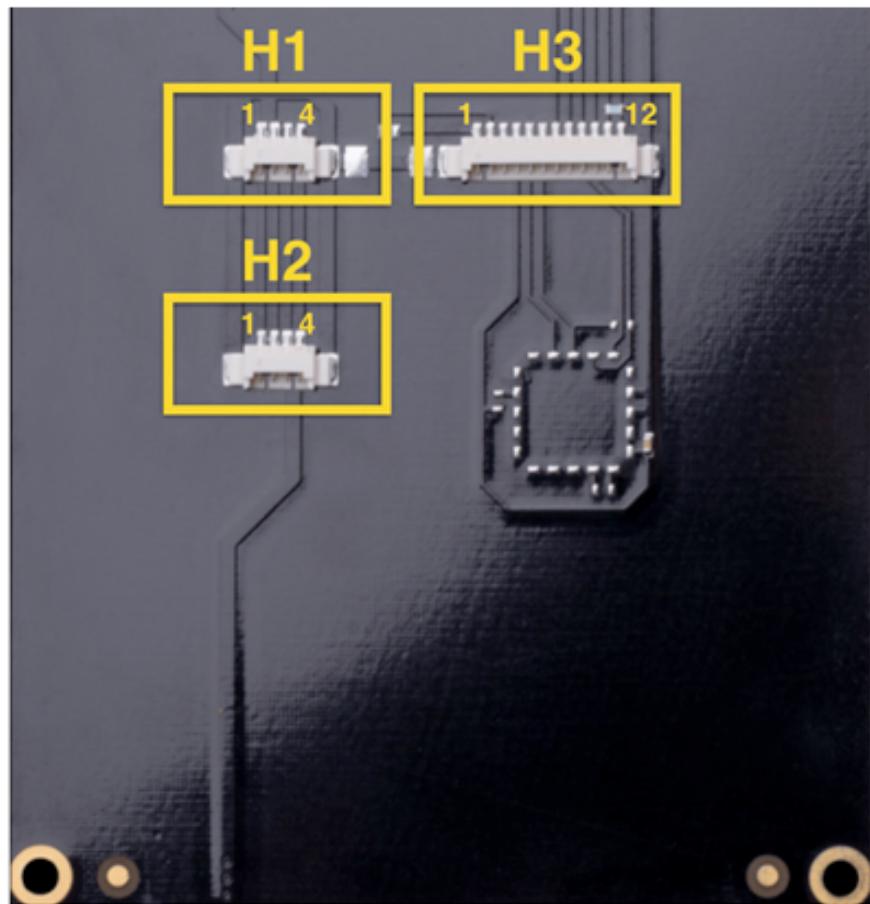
3U Solar Panel X/Y - bottom side close-up view - Connectors location
